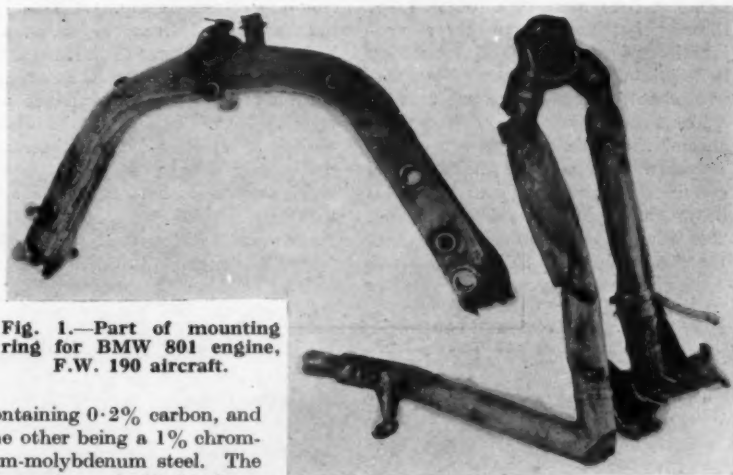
Part of mounting ring for BMW 801 engine, F.W. 190 aircraft.
